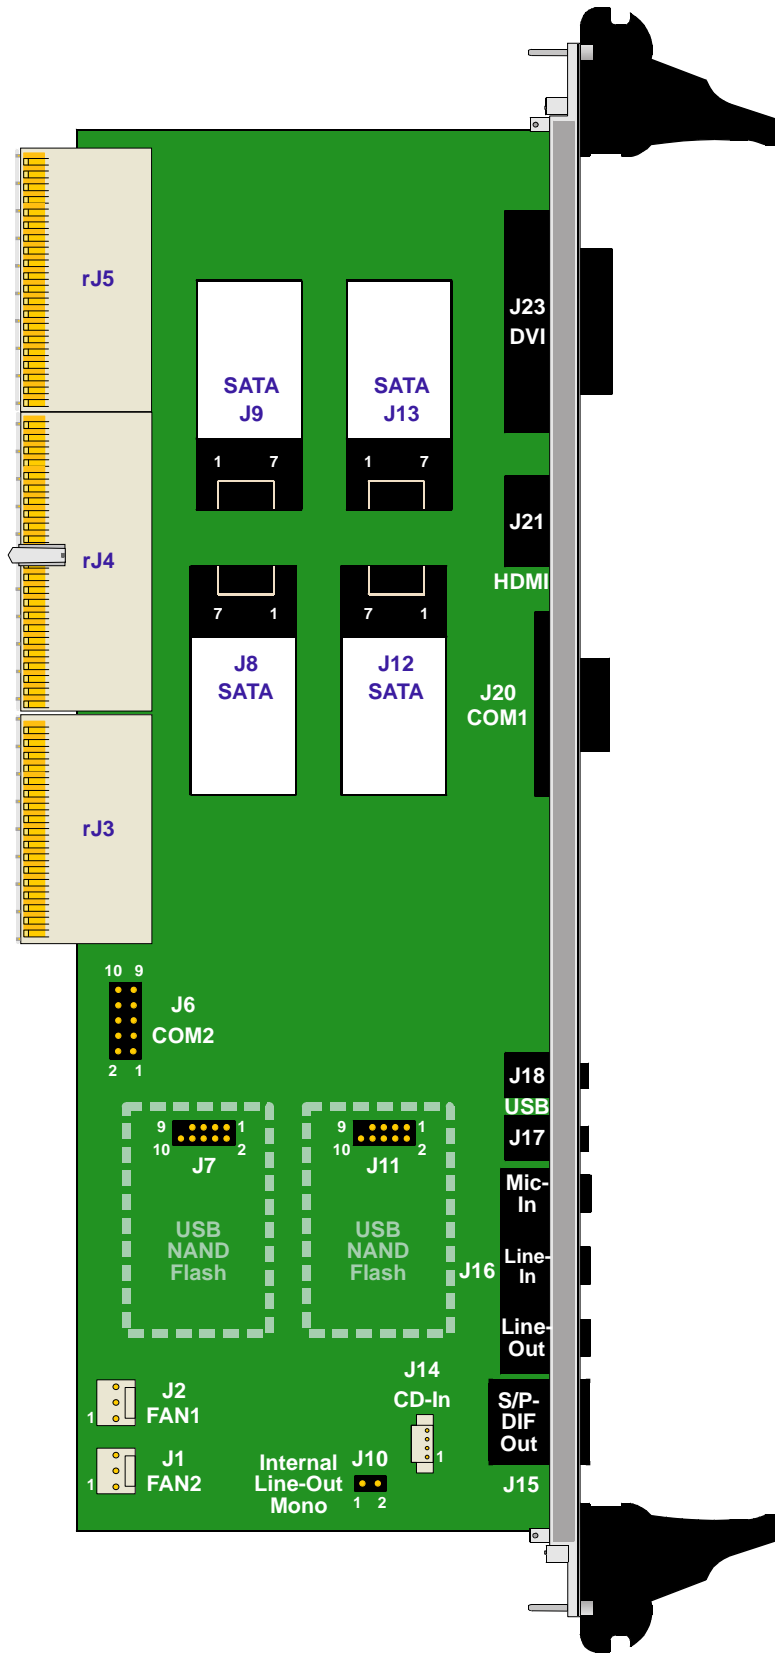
CP-RIO6-B216 Board Layout – Front View
